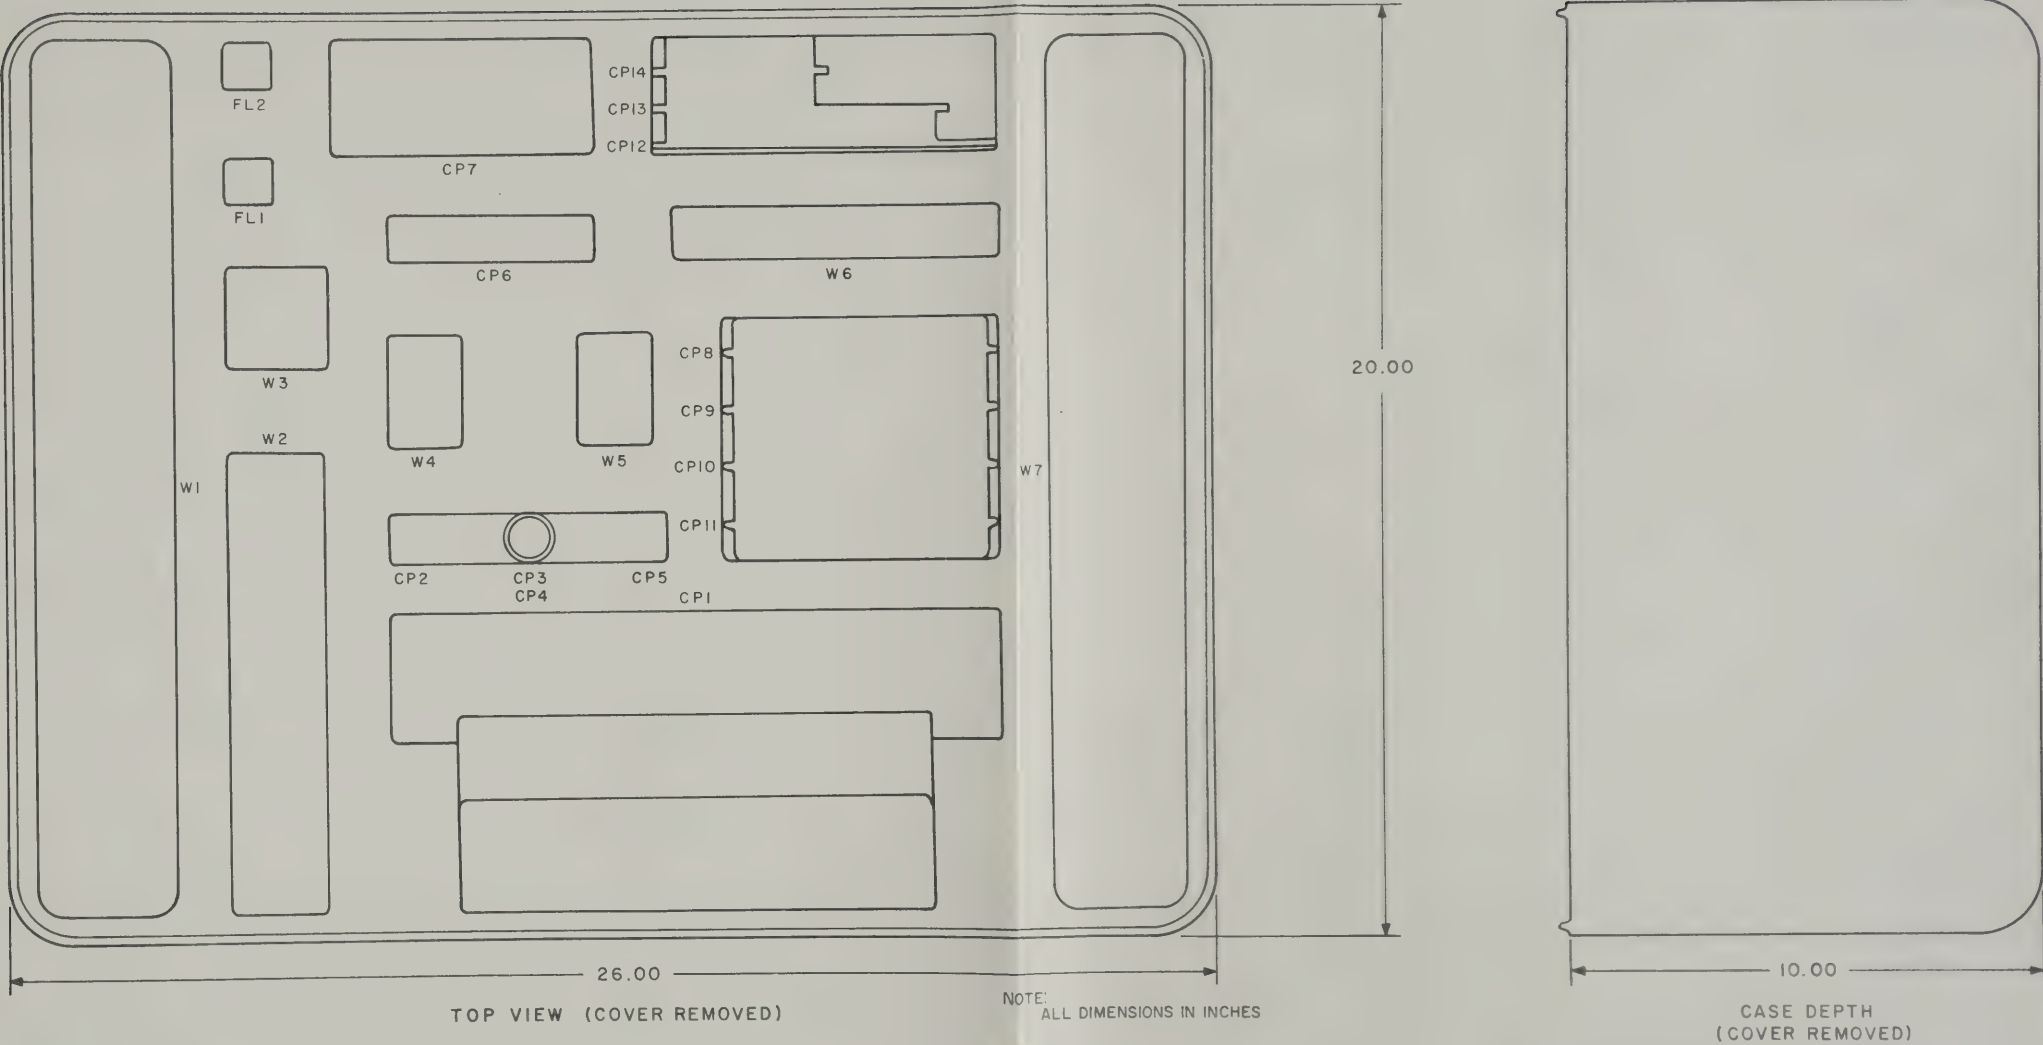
Communications Test Kit, MK-1104/TYA-11, Installation Drawing (Sheet 2 of 2)
